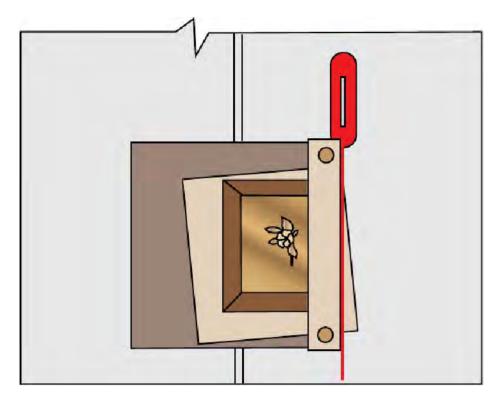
Cutting Board. The Sliding Table fits in the miter groove and the hold-down board is kept in place with two dowels.
